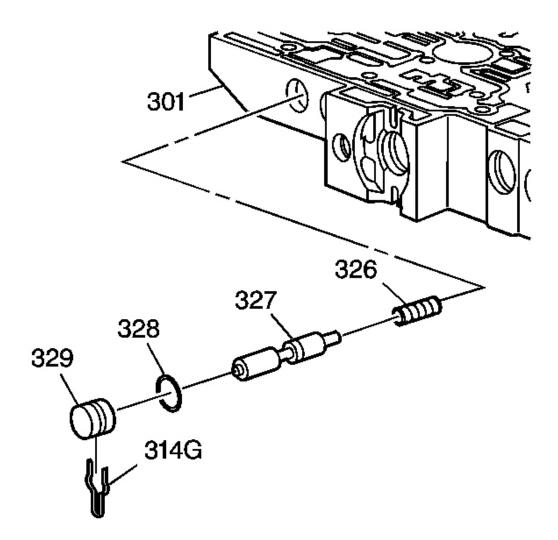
Identifying TCC Regulator Apply Valve Courtesy of GENERAL MOTORS CORP.
